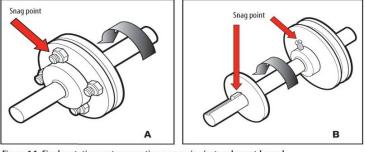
Single rotating parts presenting a snagging/entanglement hazard. (A) Snagging hazard from projecting flange bolts on rotating coupling. (B) Snagging hazard from projecting keyway and set screw on rotating shaft.
